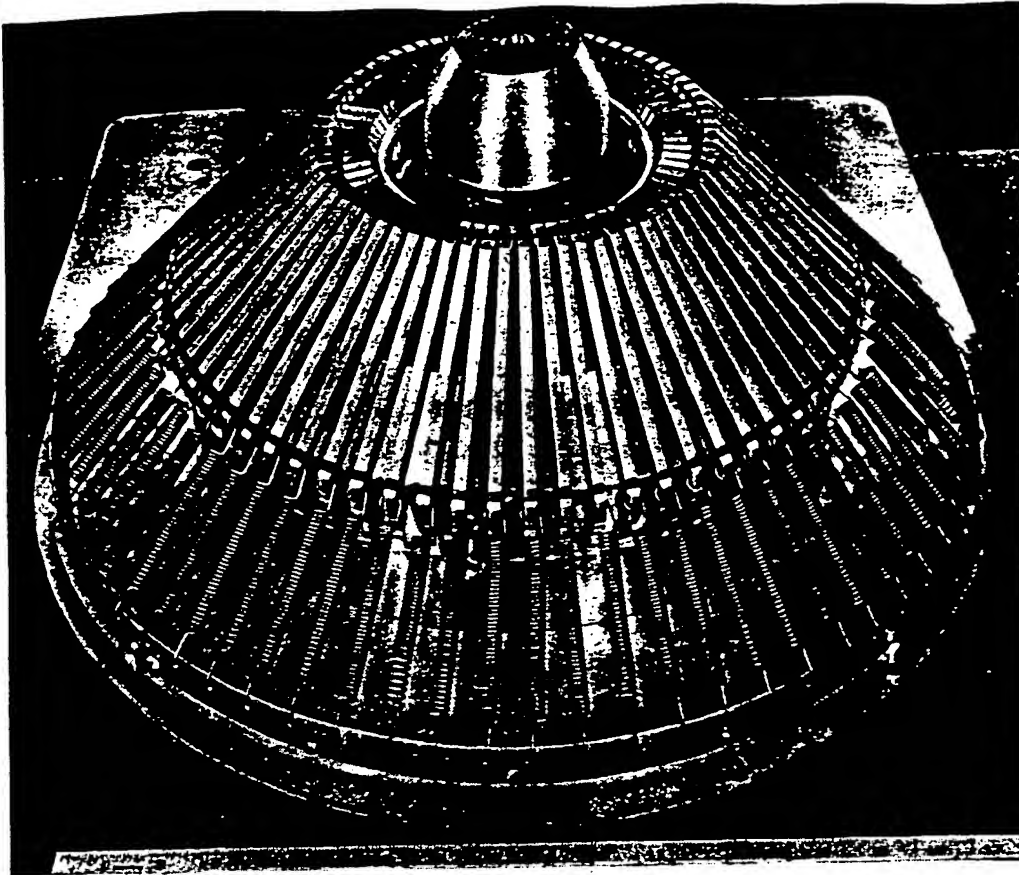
NOL compression test fixture with cover removed. (Courtesy of A. O. Smith Corp.)
